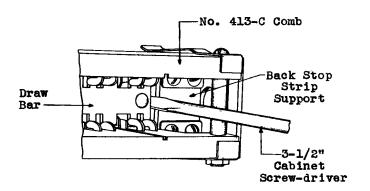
Method of Relieving Draw Bar Link of Spring Load
